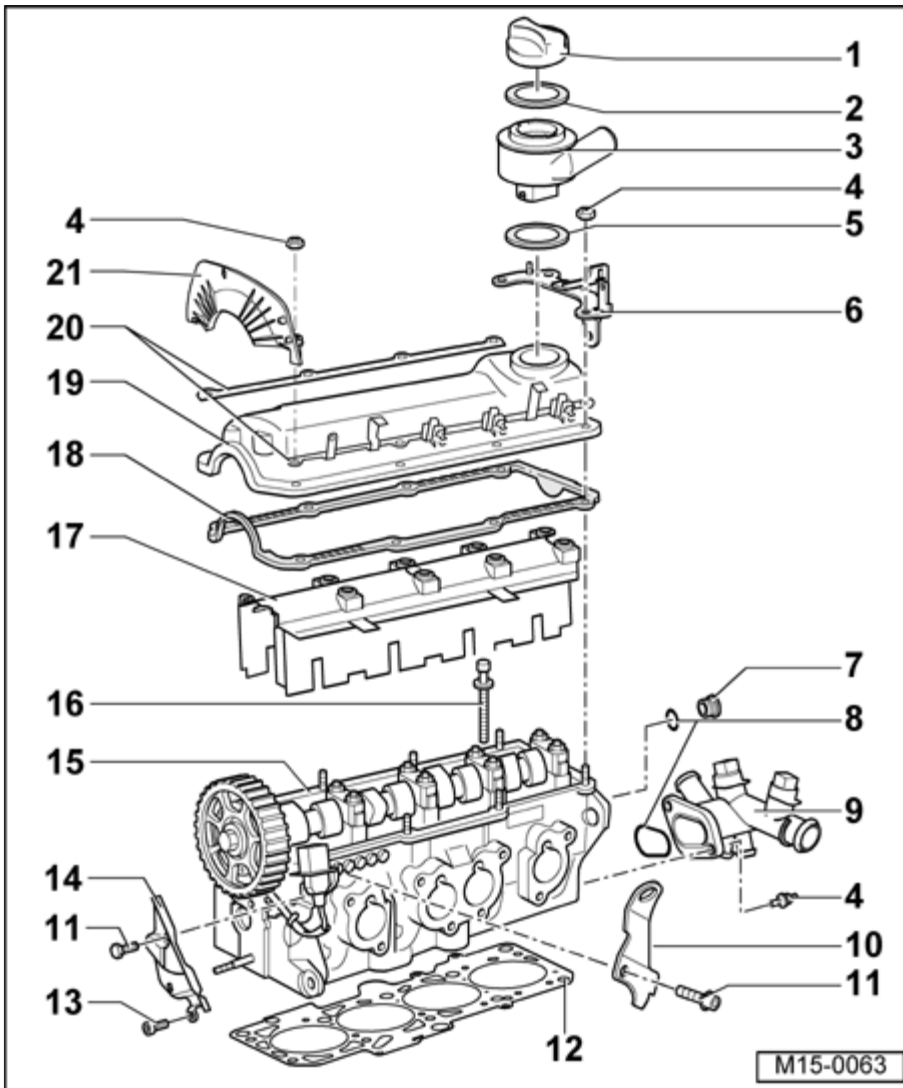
Exploded View Of Cylinder Head Components - Engine Codes AEG, AVH, AZG
